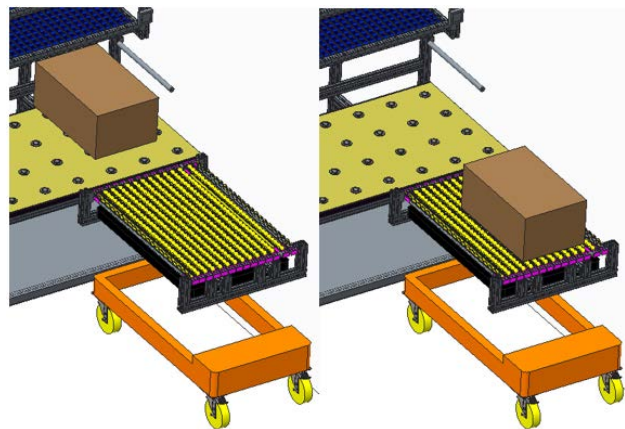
Transferring a packaged radiator form the packaging workstation to the trolley
